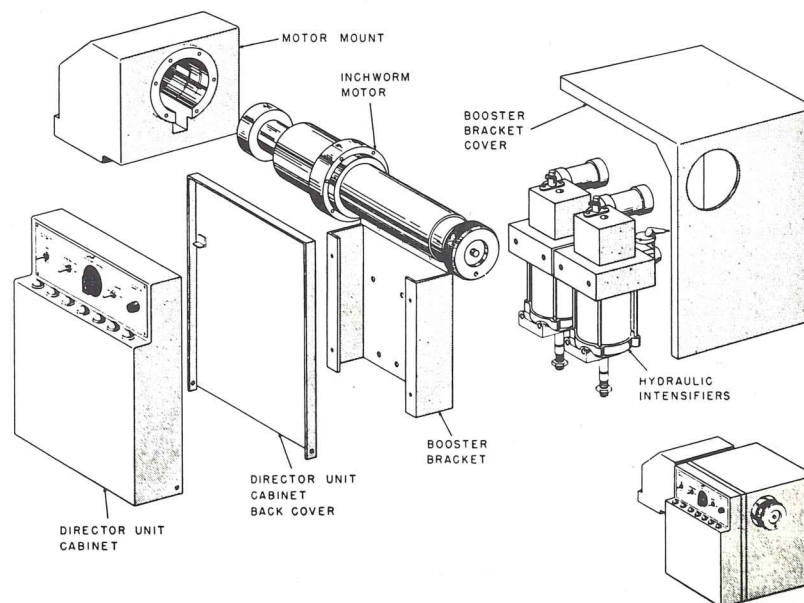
Exploded perspective showing the arrangement of the basic inchworm motor and its controls.
